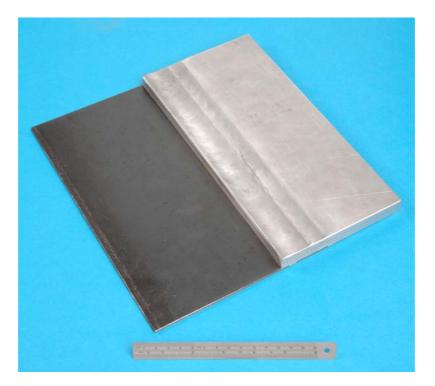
Stir-lock[™] technique for joining dissimilar metals
